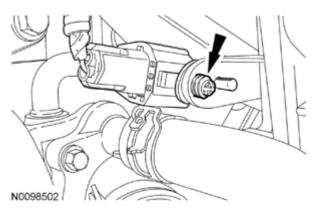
Locating Knock Sensor (KS) Electrical Connector Of Intake Manifold Courtesy of FORD MOTOR CO.
